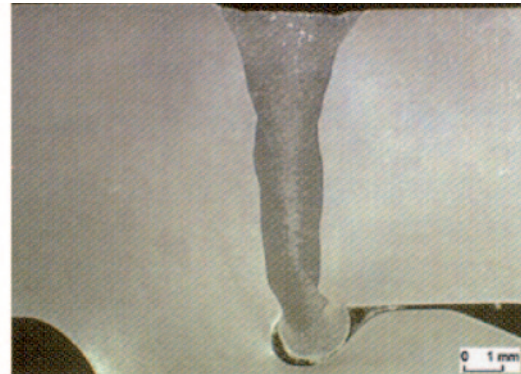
Laser hybrid weld, single pass, Al 6008, $t = 8$ mm extruded profile, laser power 10.5 kW, Welding speed 8 m/min
